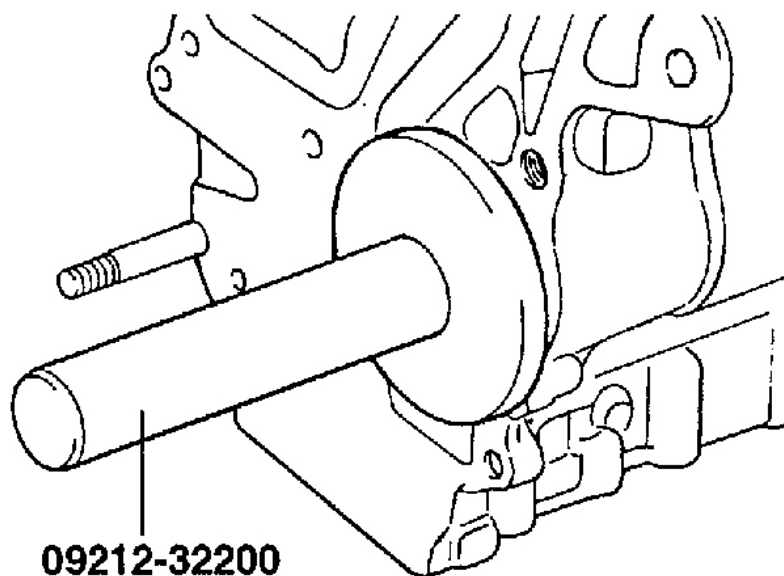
Installing Rear Bearing Of Right Counter Balance Shaft
